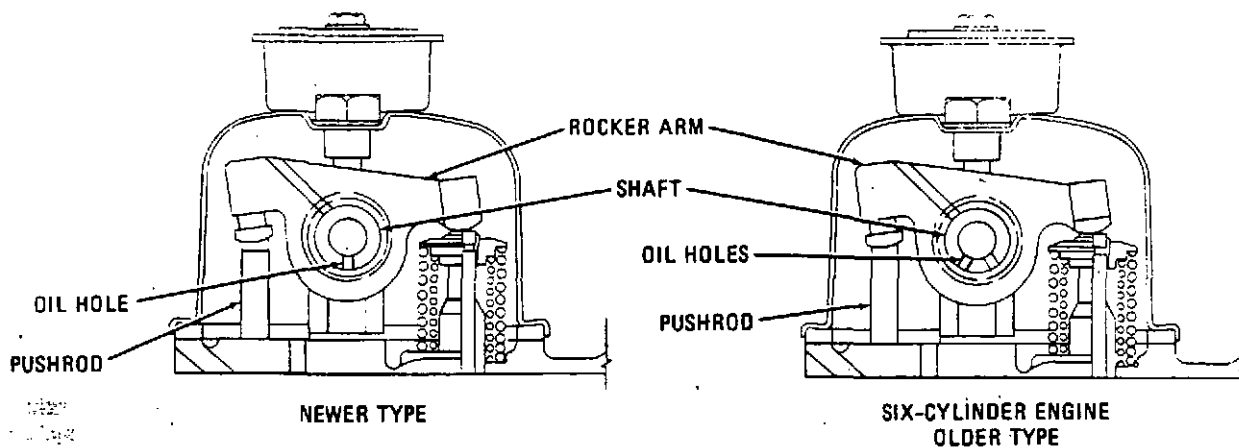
Rocker Arm Shaft Showing Oil Hole Positions
